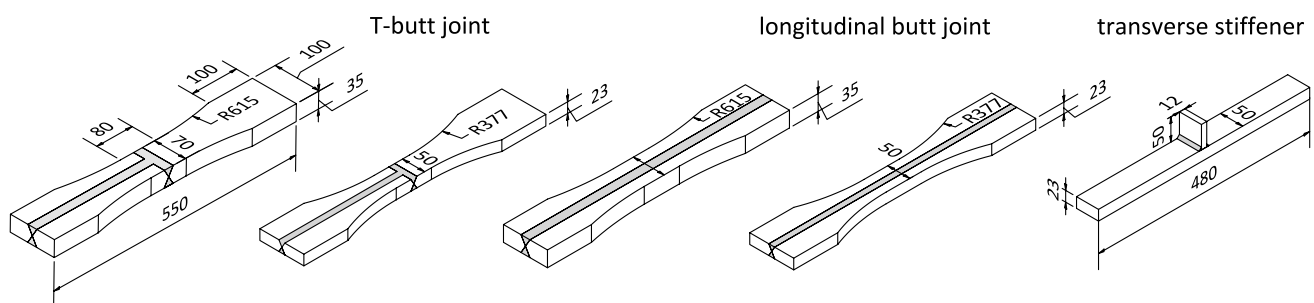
Specimen geometry of T-butt joints, longitudinal butt joints, and TS
